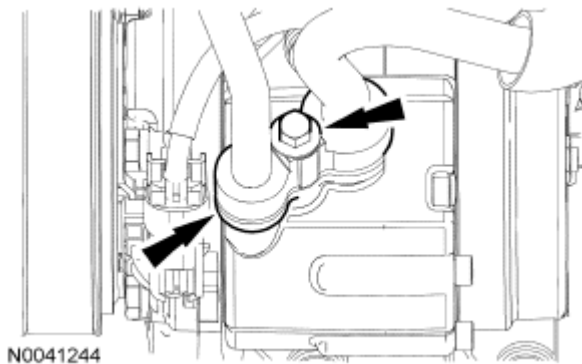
Locating A/C Manifold Onto A/C Compressor And Bolt
